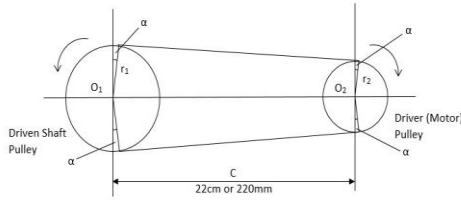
A Driver Pulley and Driven Pulley with Belt of an Open Belt Drive.
